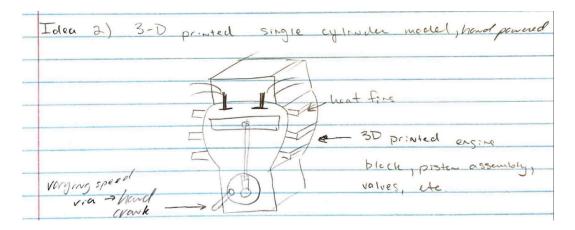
3D Printed Single Cylinder Hand-Powered Model
